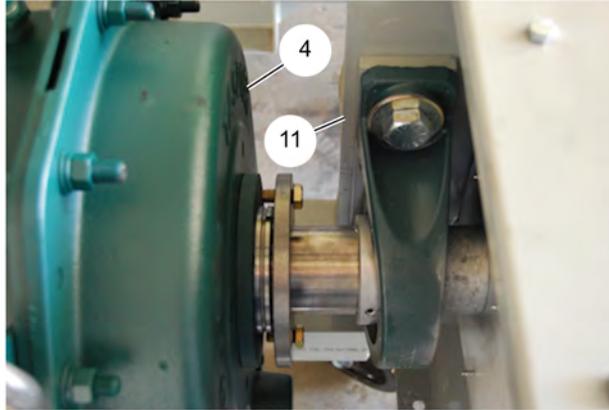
Installing the torque arm and turnbuckle to the reducer
